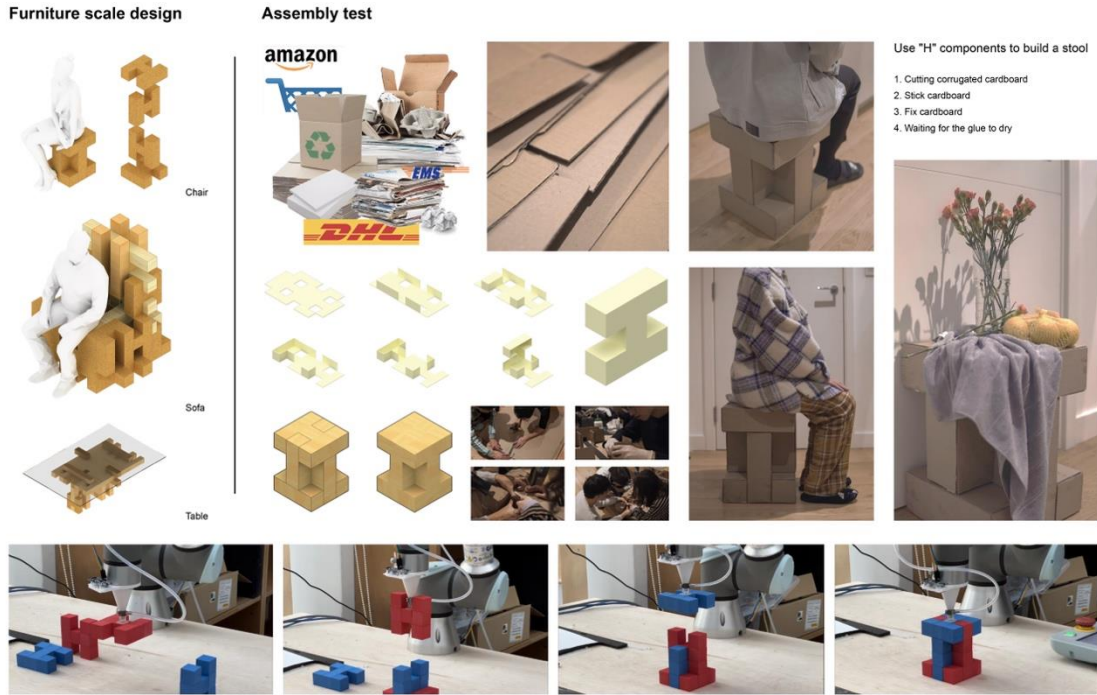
Furniture scale design and the assembly test- take a stool as an example
